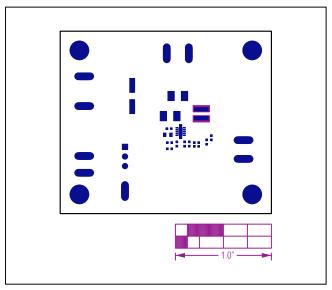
MAX17542G 3.3V Output EV Kit Component Placement Guide—Top Solder Mask
